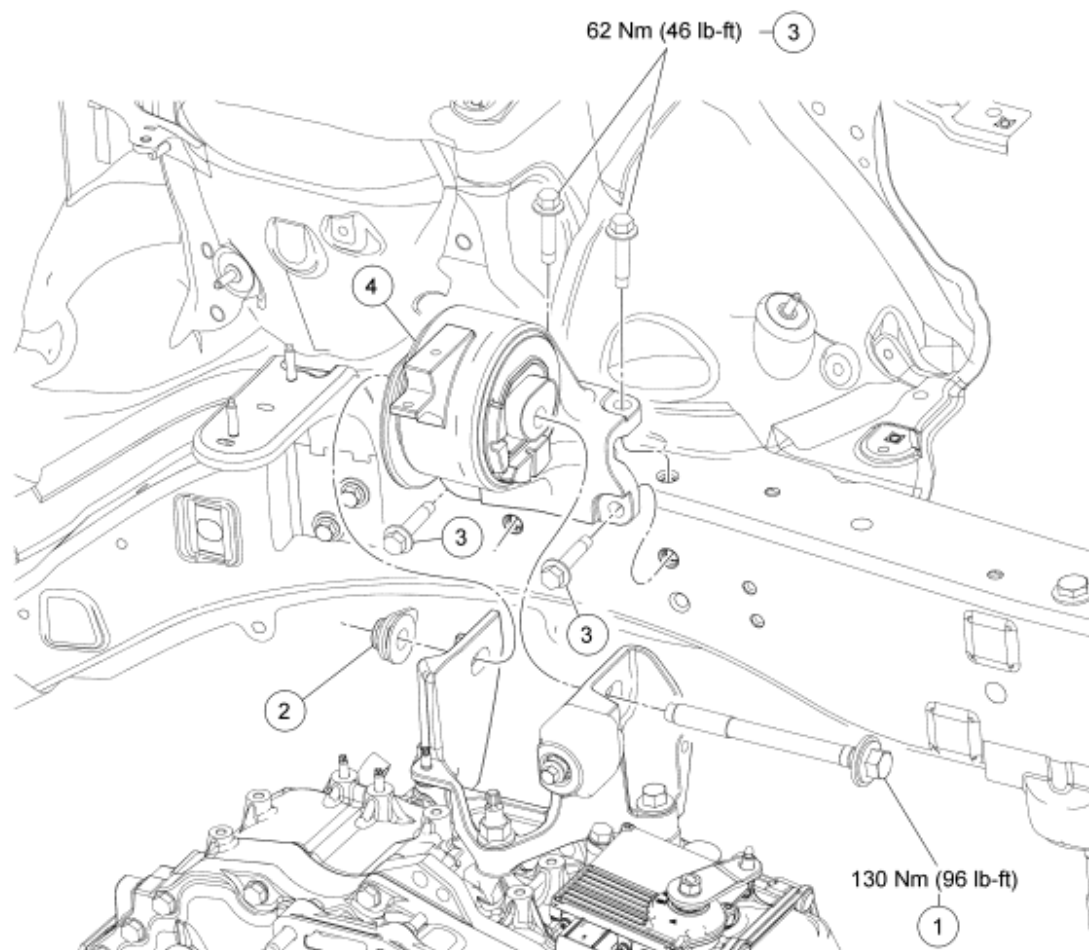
Exploded View Of Transaxle Support Insulator With Torque Specifications - 3.0L Engine
